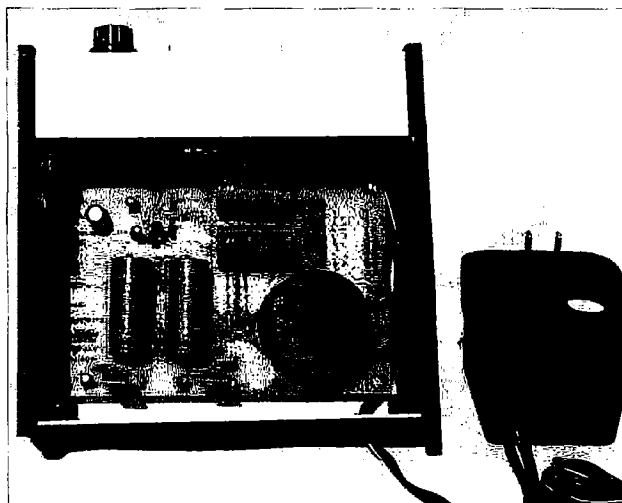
Photo A. The prototyping bench DC power supply, showing how the components are assembled inside the case.
